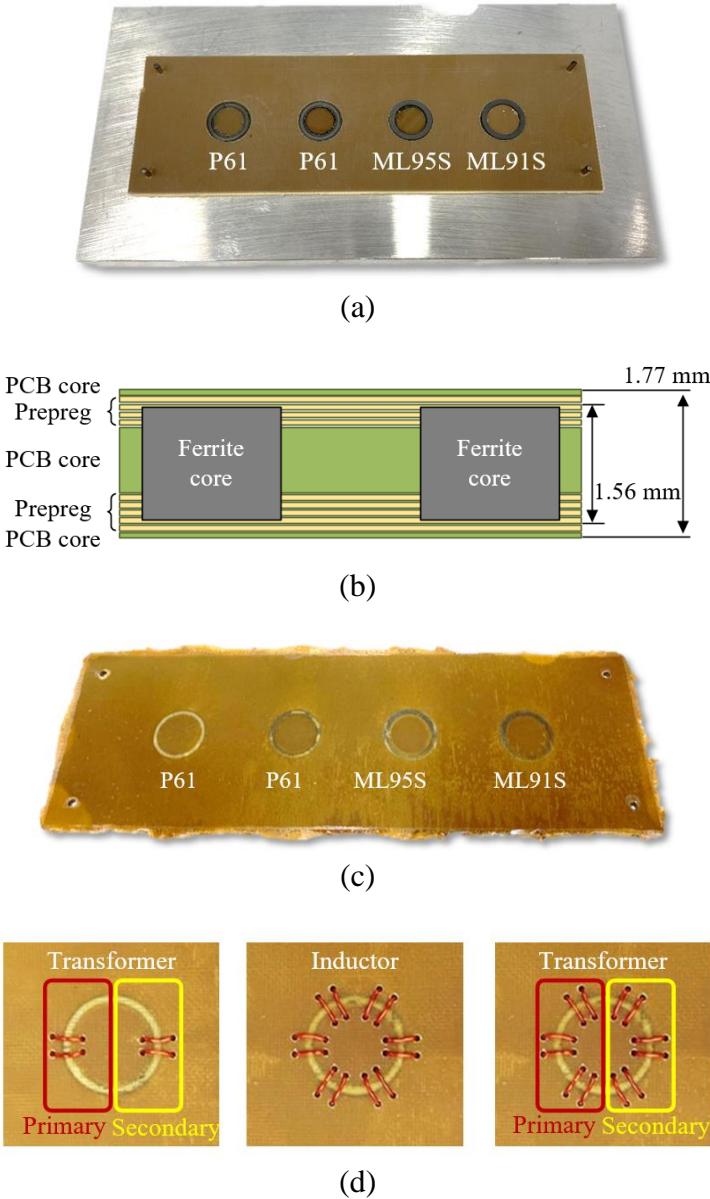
7. (a) Core assembly. (b) PCB stackup. (c) PCB-embedded magnetic board without via-holes. (d) Winding structures.
